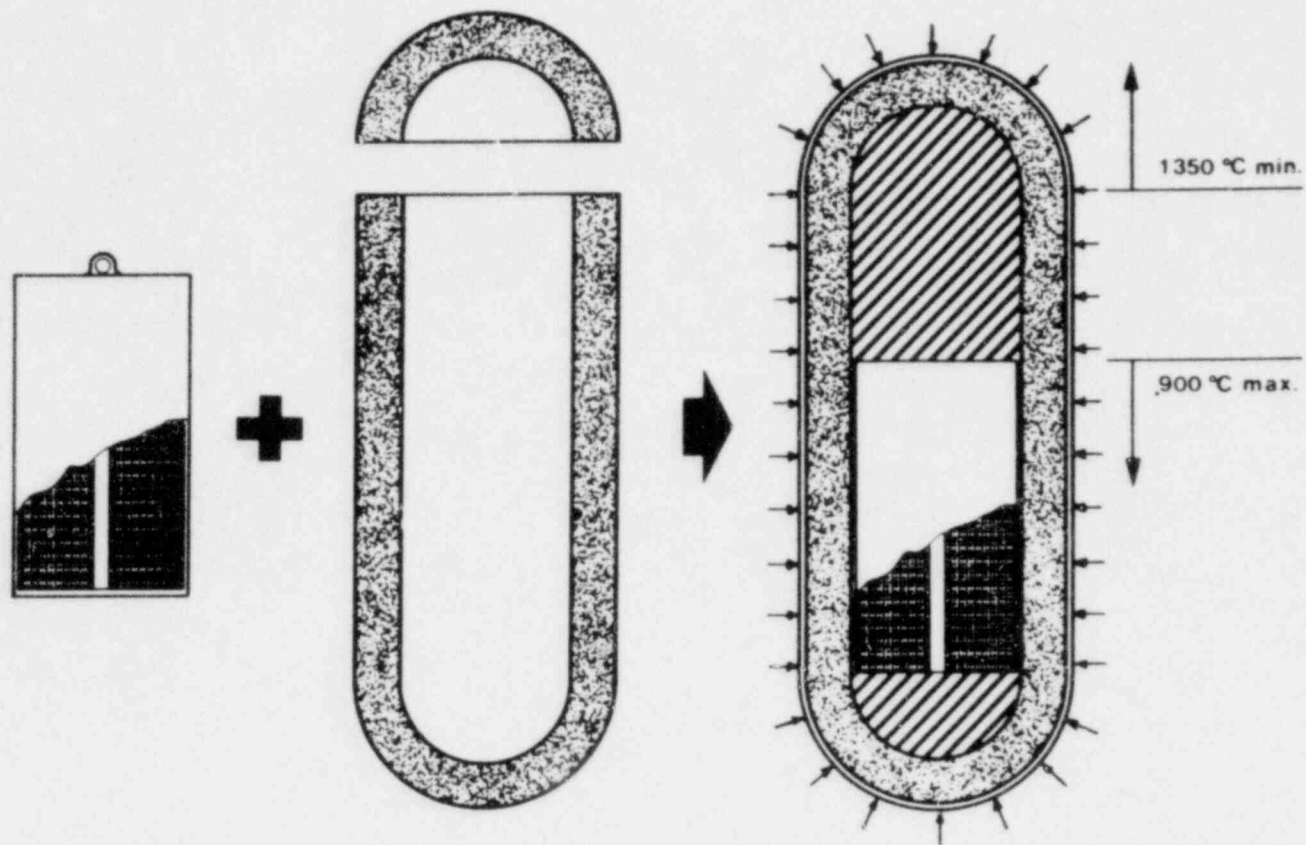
The stainless steel container with fuel rods is placed in the alumina container. The cover and the container are sealed by hot isostatic pressing to a jointfree canister.
